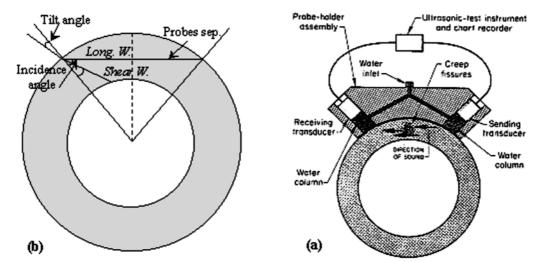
Scheme of ultrasonic method for detection of creep damage: a) inspection device for inservice inspection; b) fundamentals of the UT technique for reformer tubes inspection [3]
